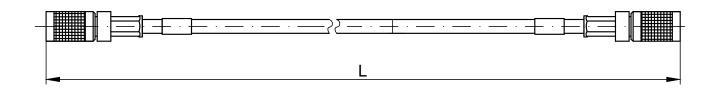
Dimensions of connection cable de82x.ec103 (PTFE tube)
